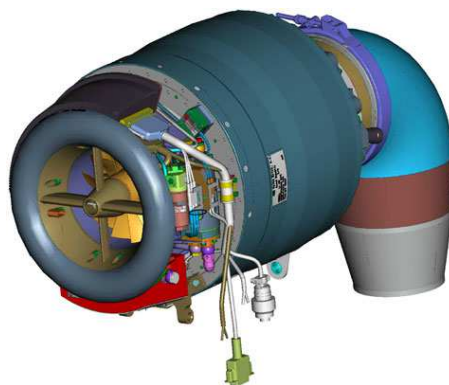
CAD drawing of TJ100 turbine with JECU (black box in the rear section) [20]
